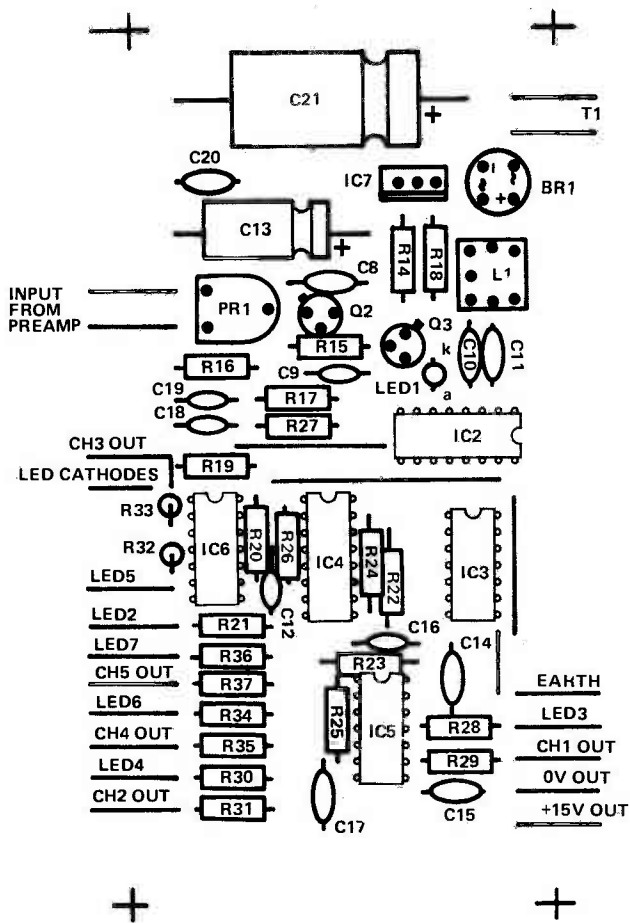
Component overlay for the decoder PCB. Note that LED1 is for setting up only and is soldered to the PCB.
